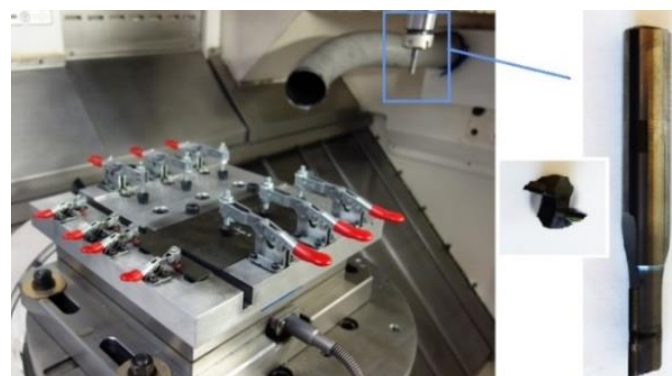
Trimming set-up (left) and end-mill tool (right)
